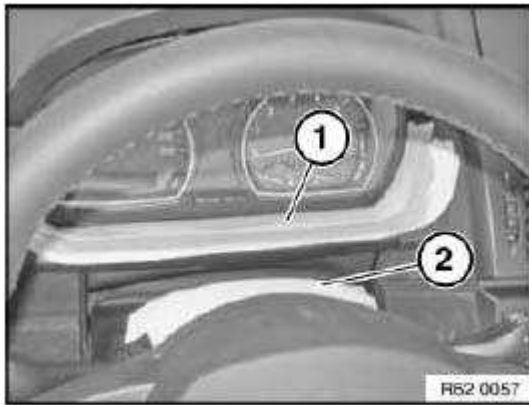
Identifying Instrument Panel Trim And Upper Steering Column Casing
